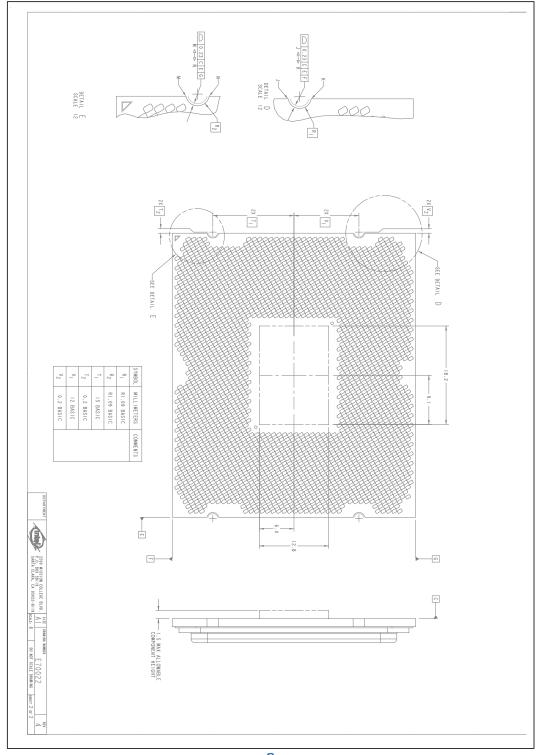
Processor Package Drawing (Sheet 2of 2)
